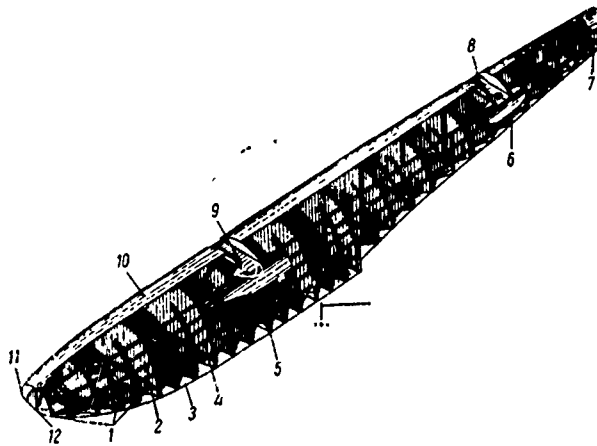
Construction of the float: 1 - frames; 2 - stringers; 3 - bottom; 4 - blank frame (partition); 5 - frame No. 12 with dish; 6 - frame No. 26 with dish; 7 - frame No. 31; 8 - rear mounting lug of landing gear struts; 9 - front mounting lug of landing gear struts; 10 - covering of float; 11 - bilge section; 12 - keel section.
